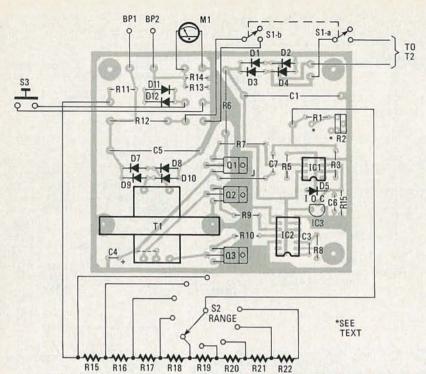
FOR SAFETY, this project requires a PC board. Here we see the parts-placement diagram for the board shown in our PC Service section.
